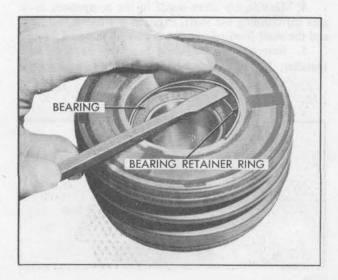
Removing Pulley and Bearing Retainer Ring
